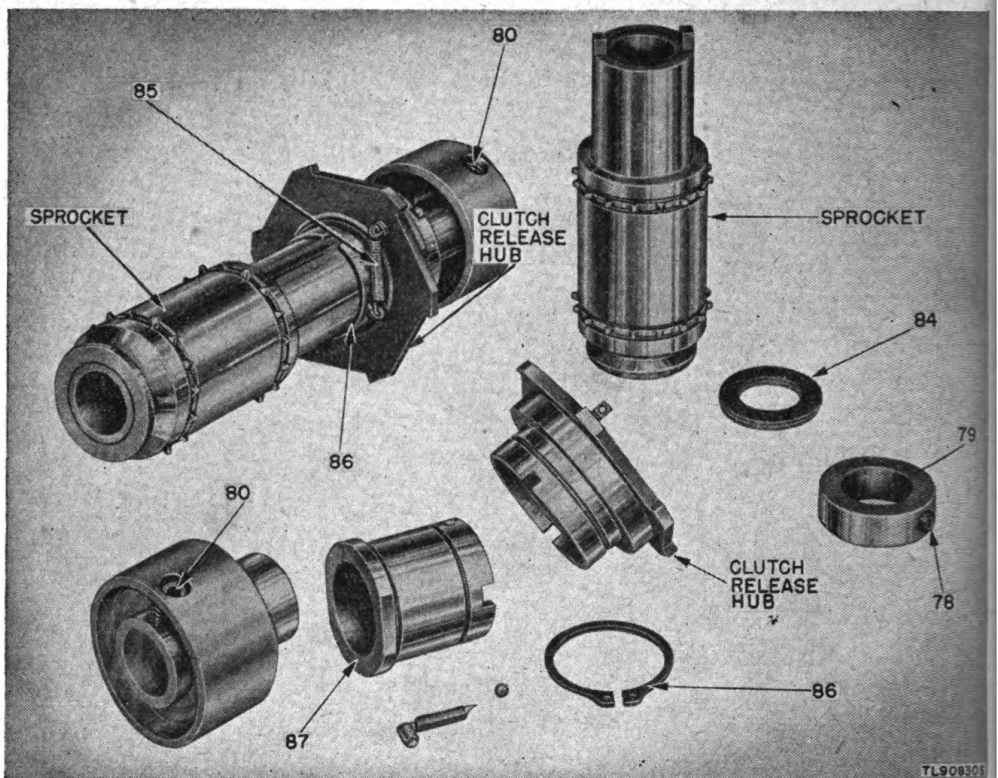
Sprocket and clutch assembly, Sound Recording Set AN/UNQ-1A.
